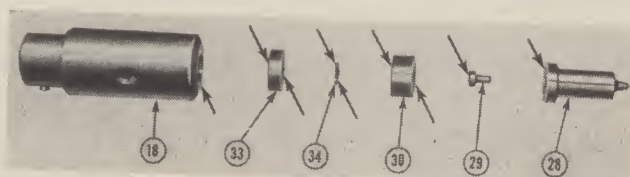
A—Arrows indicate injector sealing surfaces which may require lapping.
